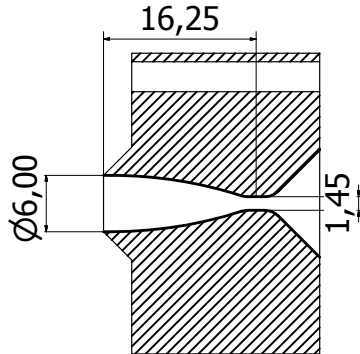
A CAD drawing of the de Laval nozzle used for gas jet shaping. Units are in mm.
